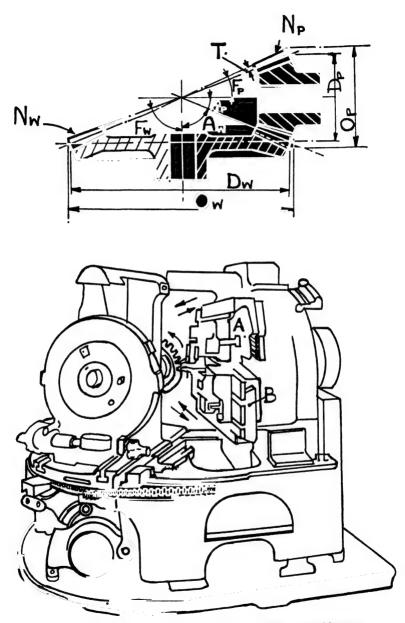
Bevel Gears and Bevel Gear Generating Machine
